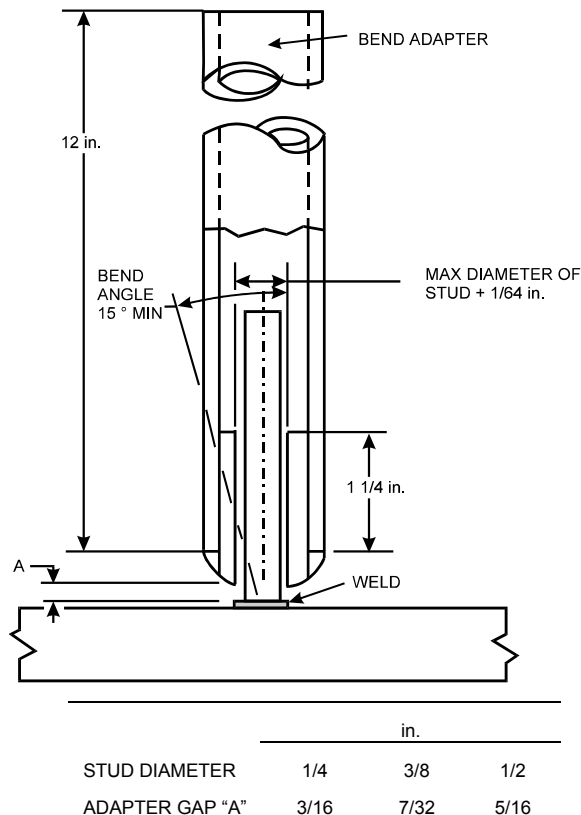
Stud Welding Bend Jig (see 7.6.6.2)
